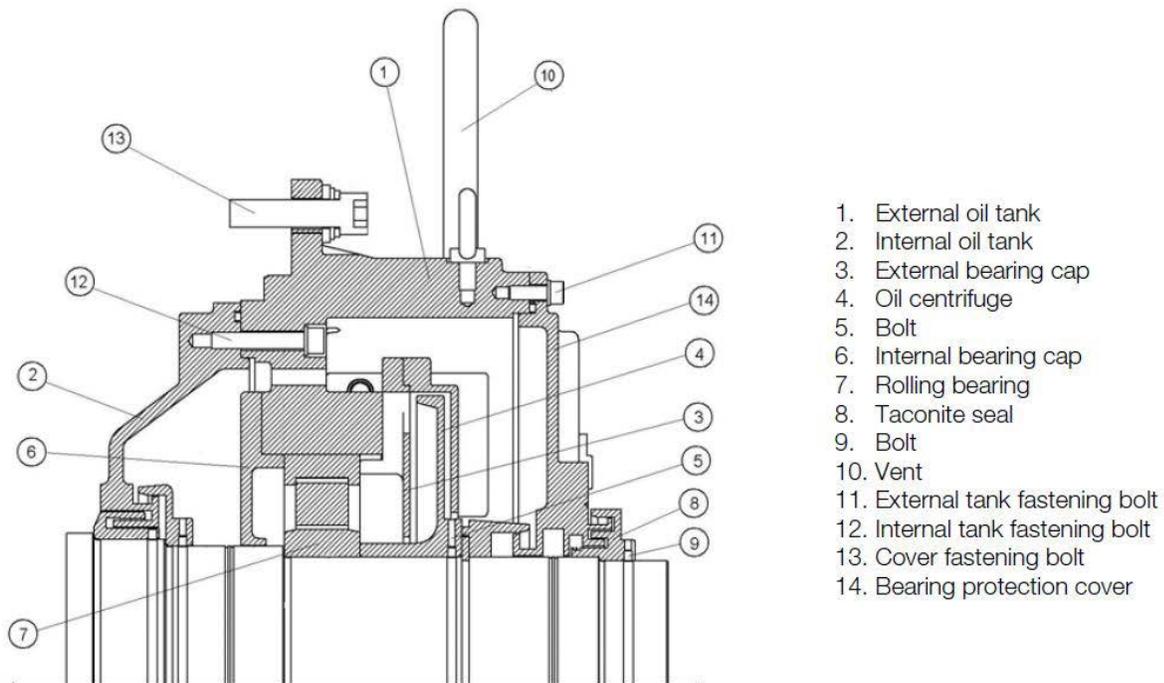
Parts of the Oil-Filled Rolling Element Bearing
